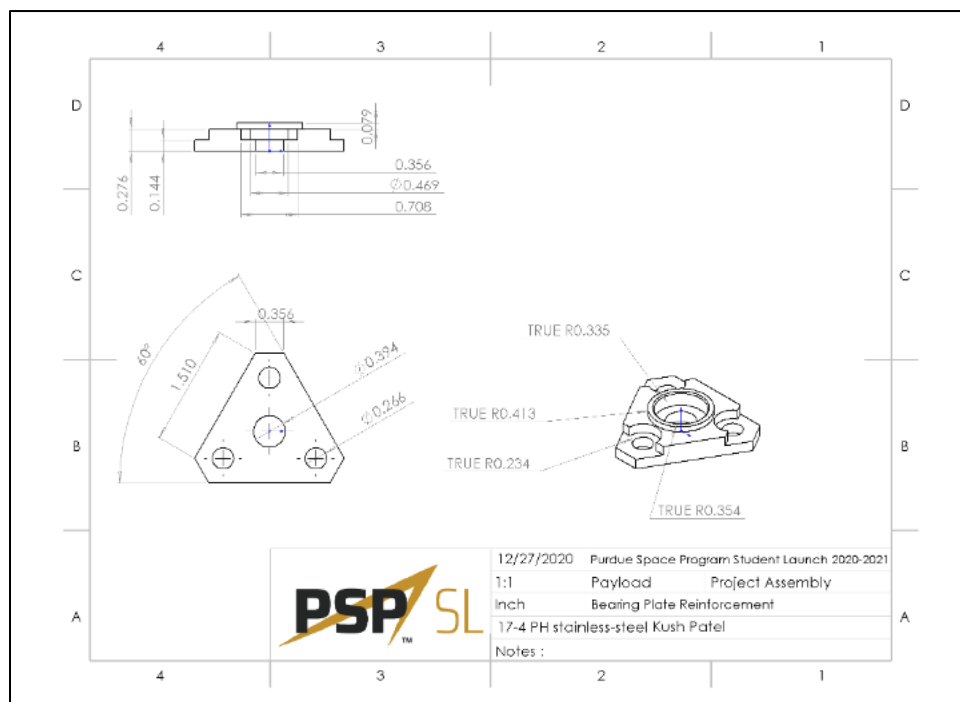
Bearing Plate Reinforcement Dimensional Drawing
